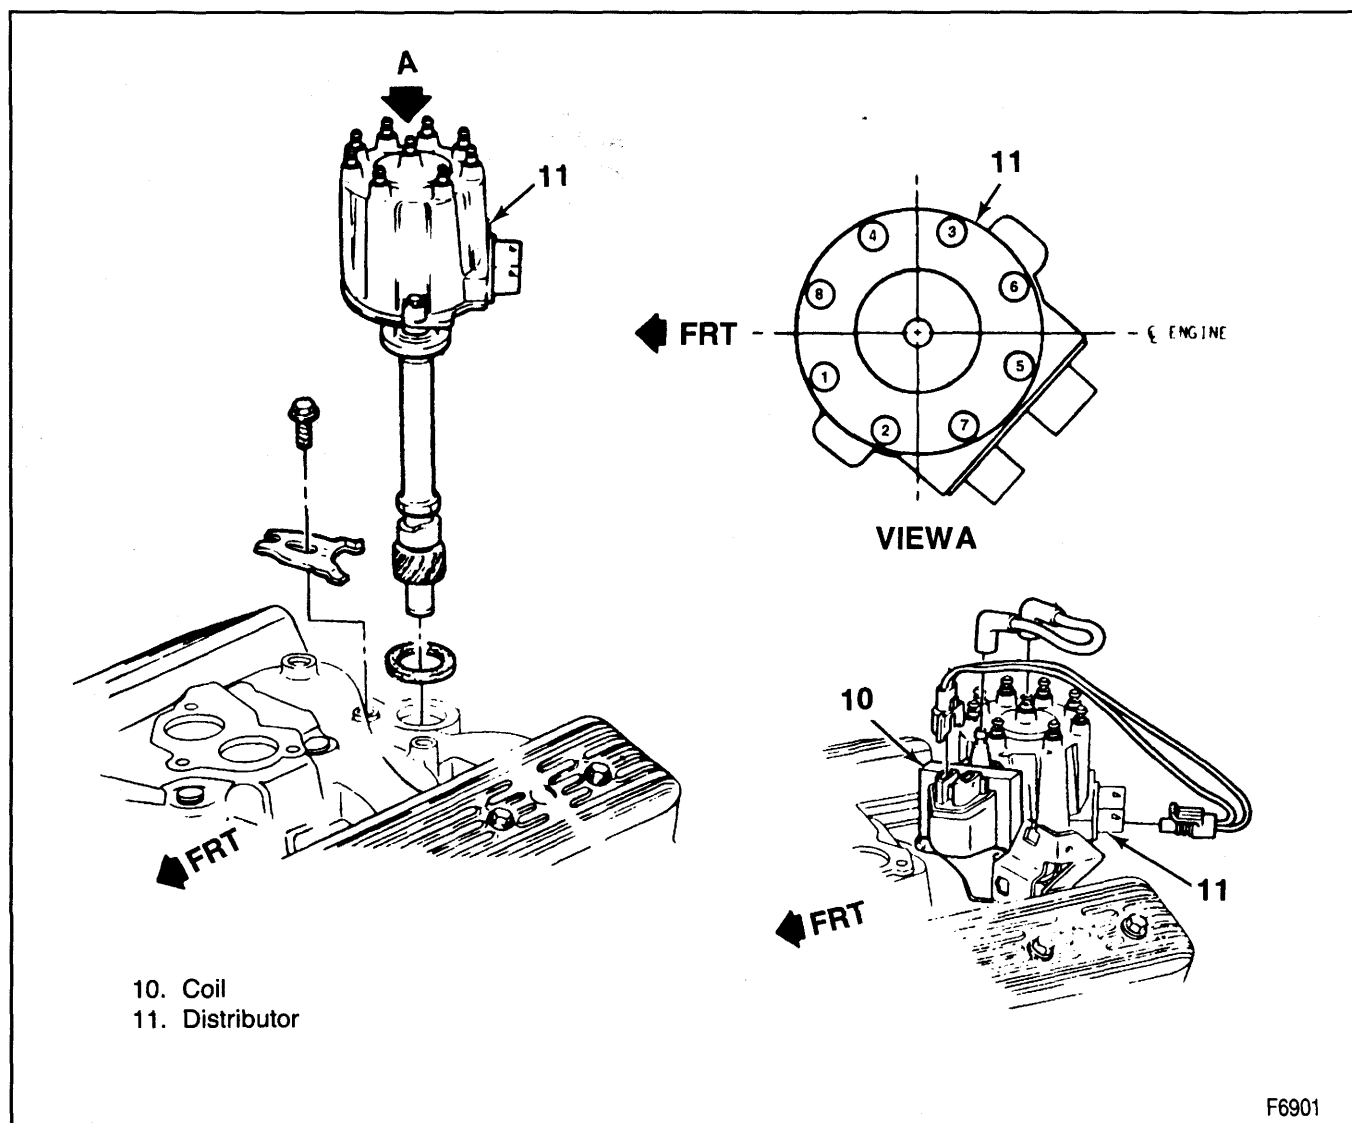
Distributor and Ignition Coil (5.0L and 5.7L Engines)
